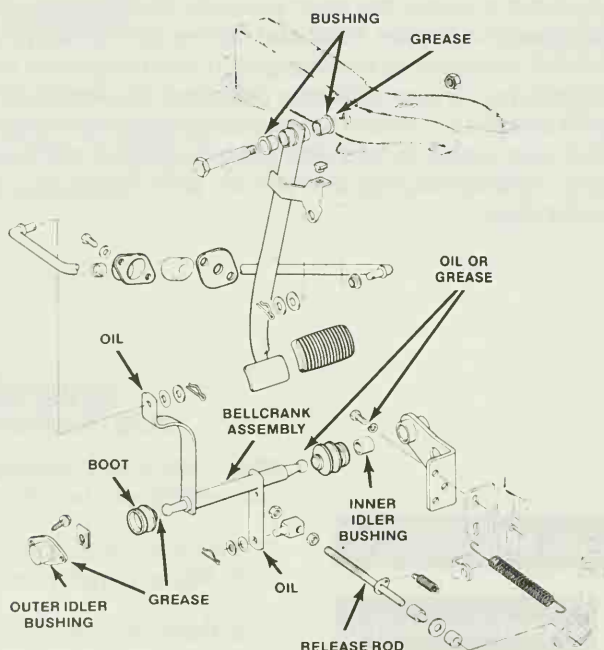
Points where the clutch linkage is lubricated. (American Motors Corporation)
